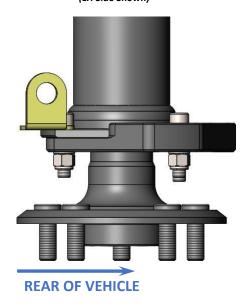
TOP VIEW Primary Caliper Bracket Installed (DB1515BR LH Side Shown)
